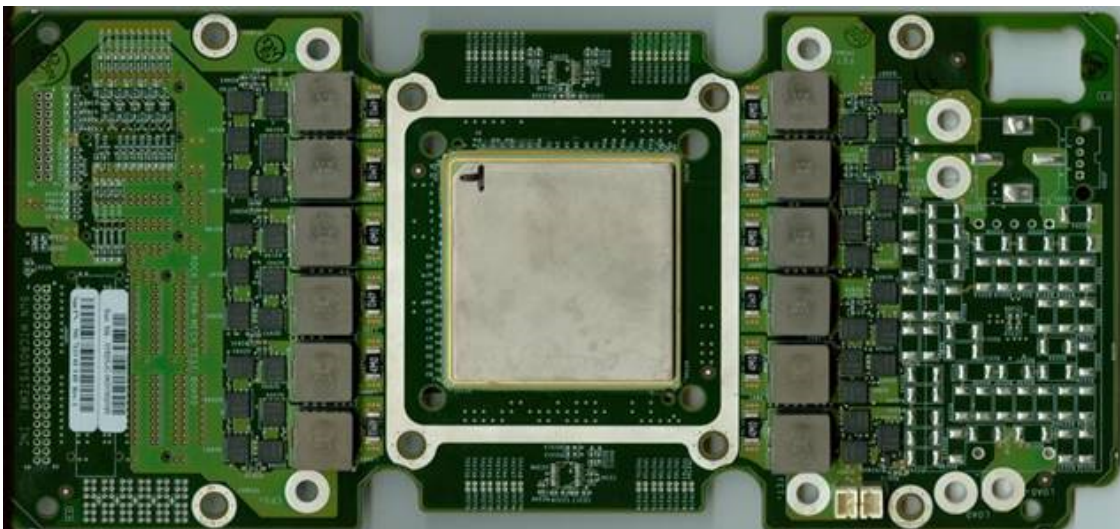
Pre-Assembled Test Board for Clamping Experiments
